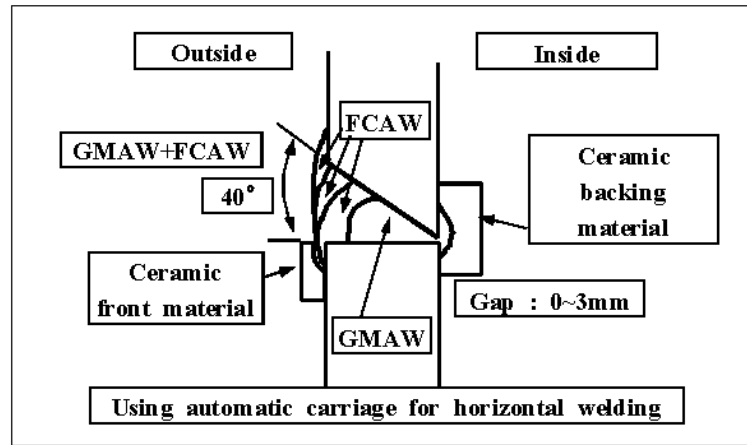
Schematic diagram of new developed horizontal welding process
